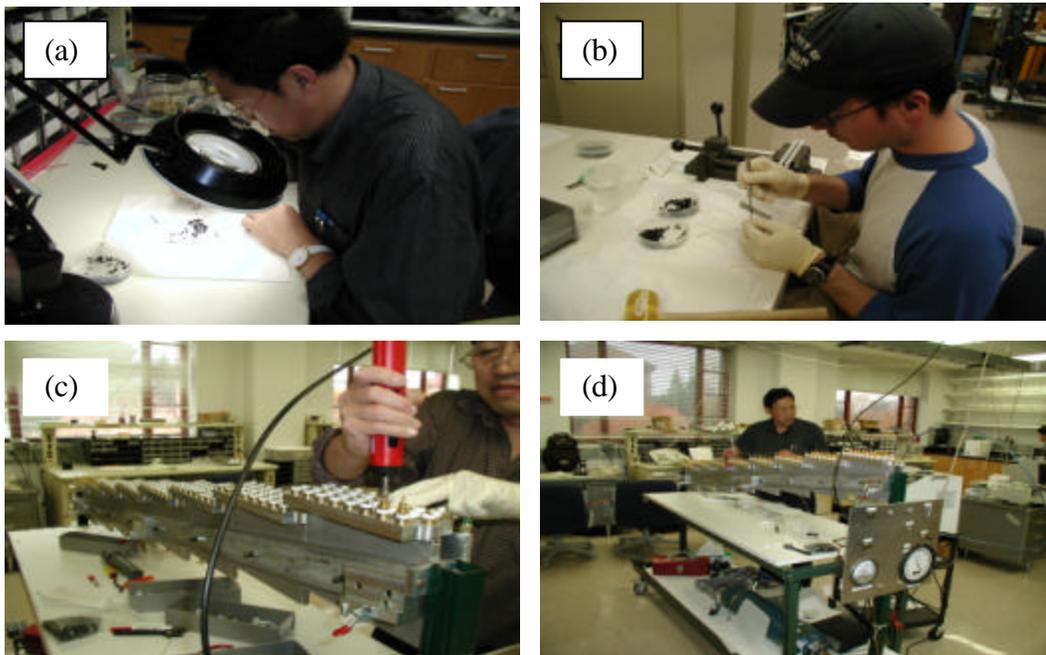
Gasbar pre-assembly and leak test. (a) O-ring pre-selection; (b) tubelet assembly; (c) assembly of gas manifold on jig; (d) leak checking and repairing.
